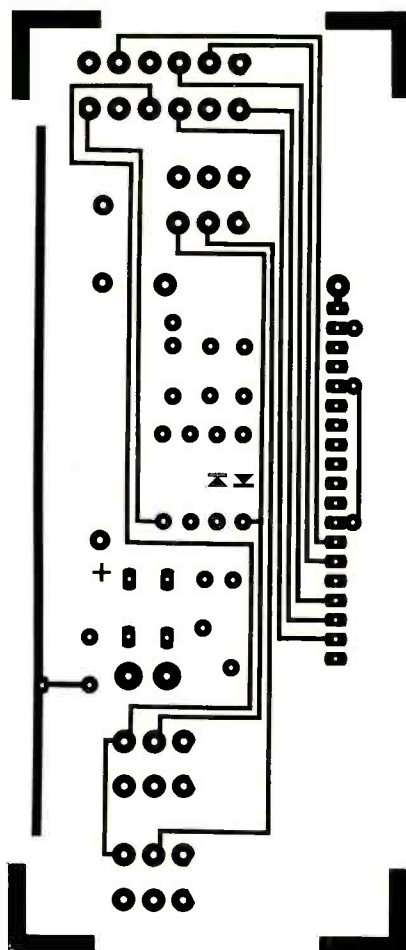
BACK BOARD component side has this foil pattern (also full-size). Plated-through holes connect front and rear foils.
